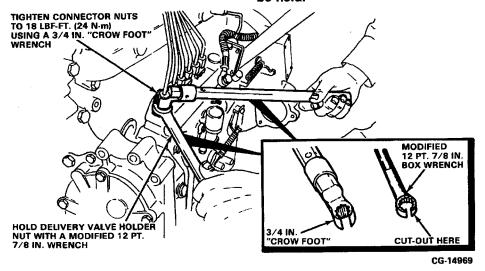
Install Injection Line Connector Nuts to the Pump Delivery Valve Holders
